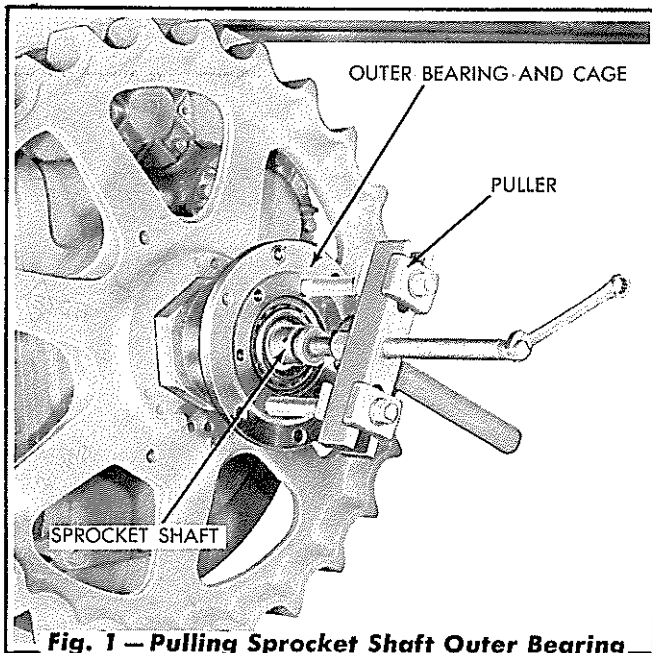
Pulling Sprocket Shaft Outer Bearing
